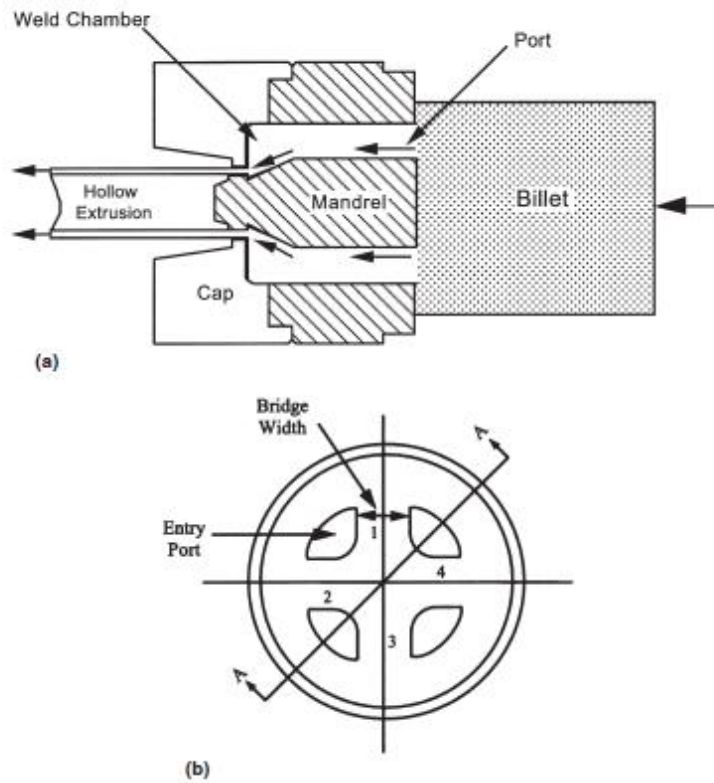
Schematic of welding chamber porthole die hollow extrusion. (a) Cross section showing metal flow into port streams and around the mandrel. (b) Billet entrance face of the die set [18]
